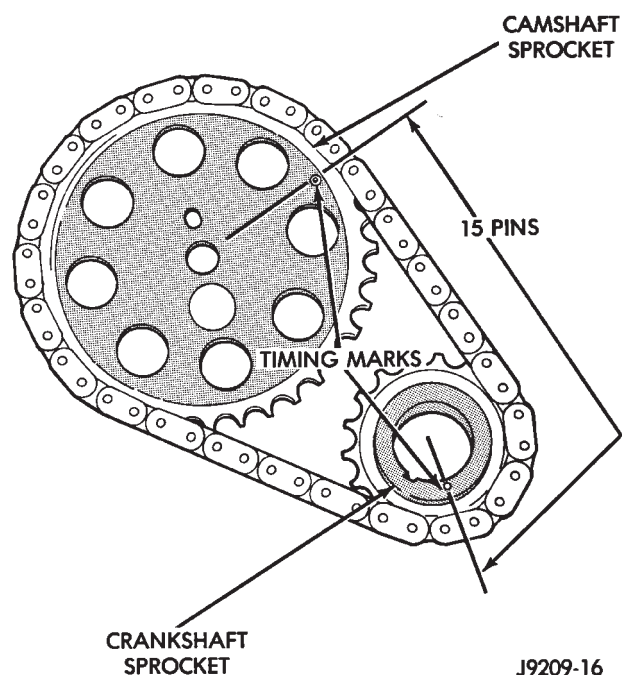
Verify Crankshaft—Camshaft Installation—Typical
